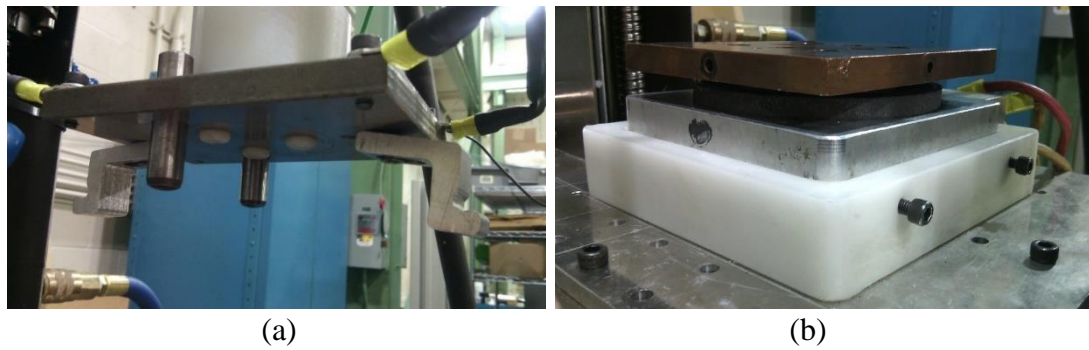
(a) New mounting location for the collet; (b) new copper plate with spring-loaded graphite slipring
